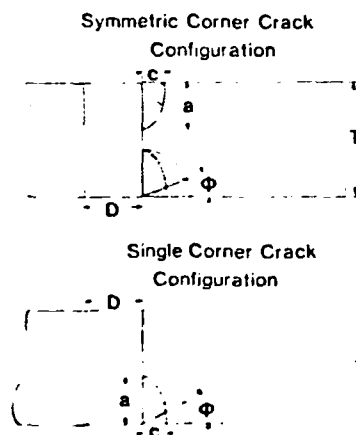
Schematic drawing of crack plane showing location of single and symmetric corner cracks located at bore of hole.
